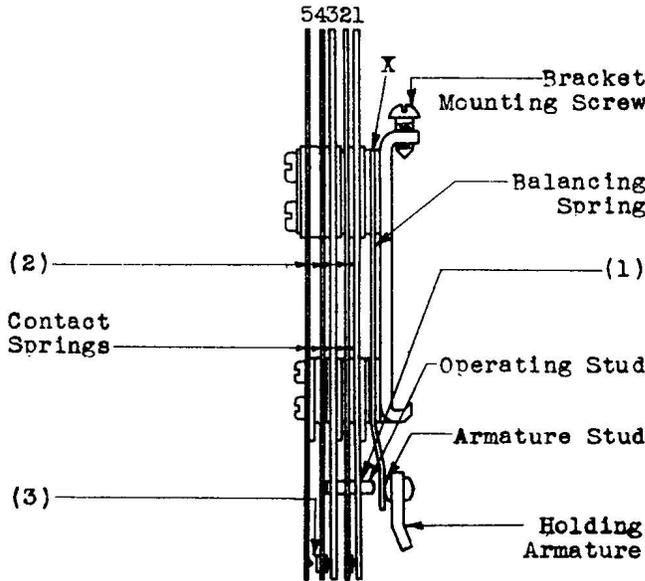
Fig. R - Clamp Type Holding Off-Normal Spring Assembly
